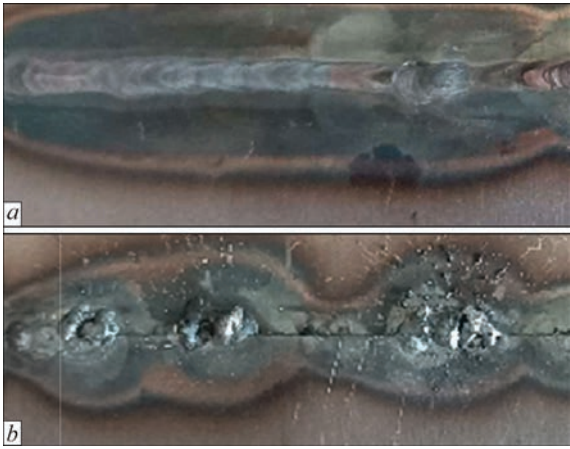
Weld sample: a — defectfree section; b — defective section
